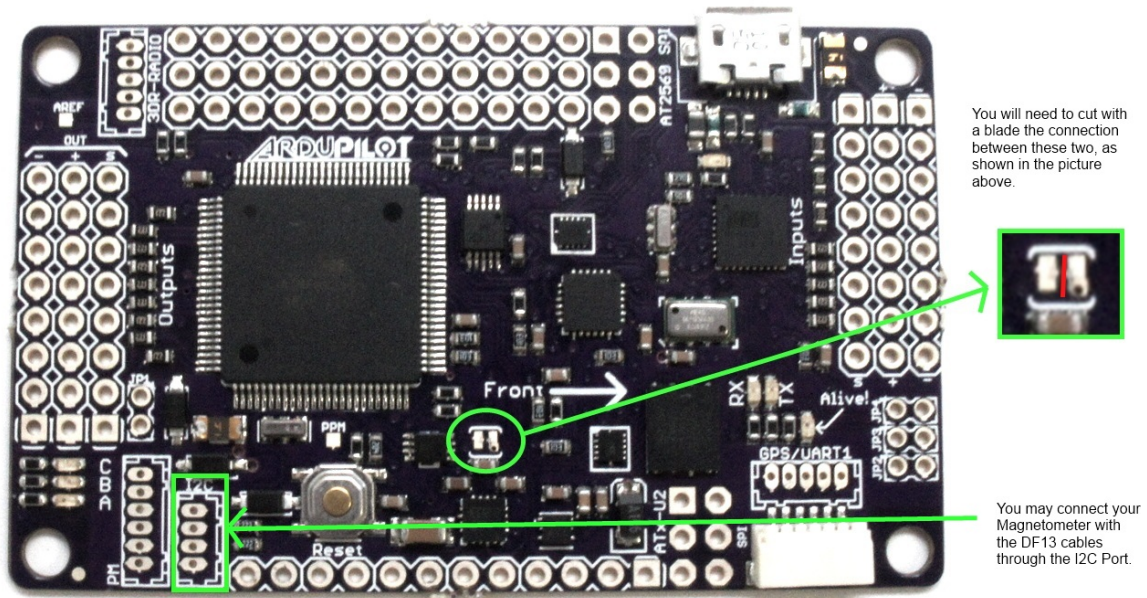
APM board onboard compass PCB trace jumper to cut.
